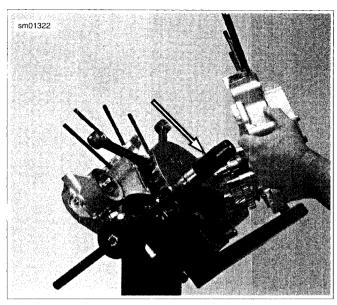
Assembling Crankcases With Crankshaft Guide Tool (Part No. HD-42326-A)
